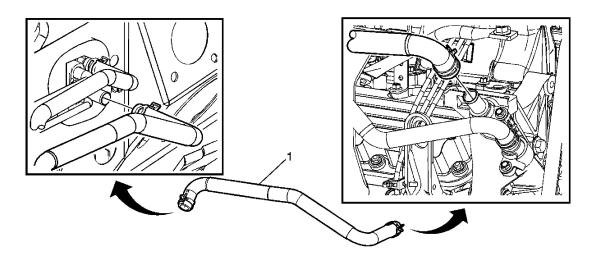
Removing/Installing Heater Hoses (L26) Courtesy of GENERAL MOTORS CORP.
